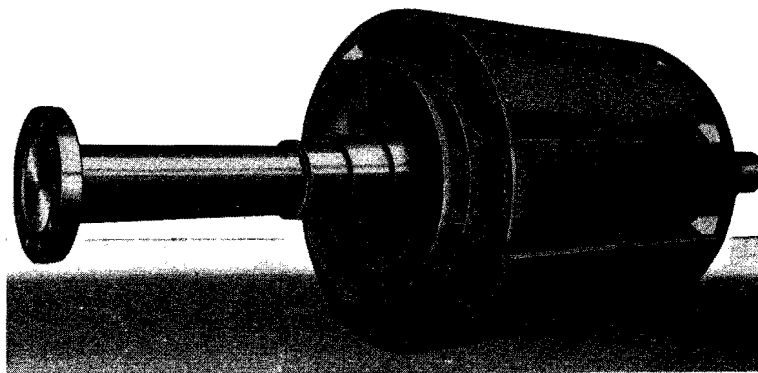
ROTOR COMPLETELY ASSEMBLED
